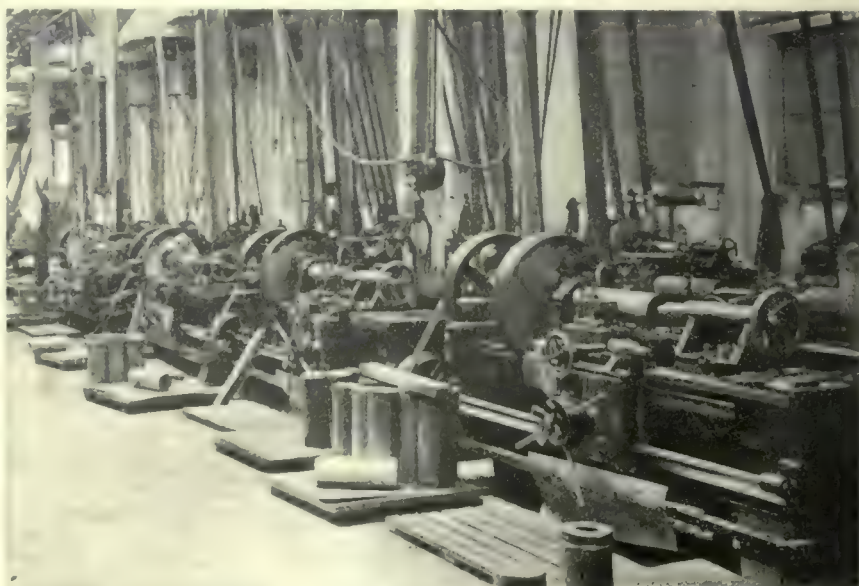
JOHNSTON & JENNINGS SPECIAL PURPOSE LATHES FOR ROUGH TURNING 6 IN. SHELLS.
